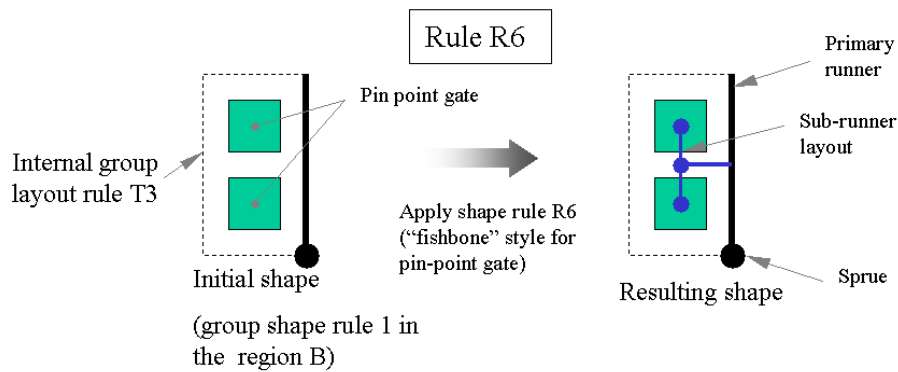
Example of an SG rule of cold runner layout design for pin-point gate on multiple moulding parts
